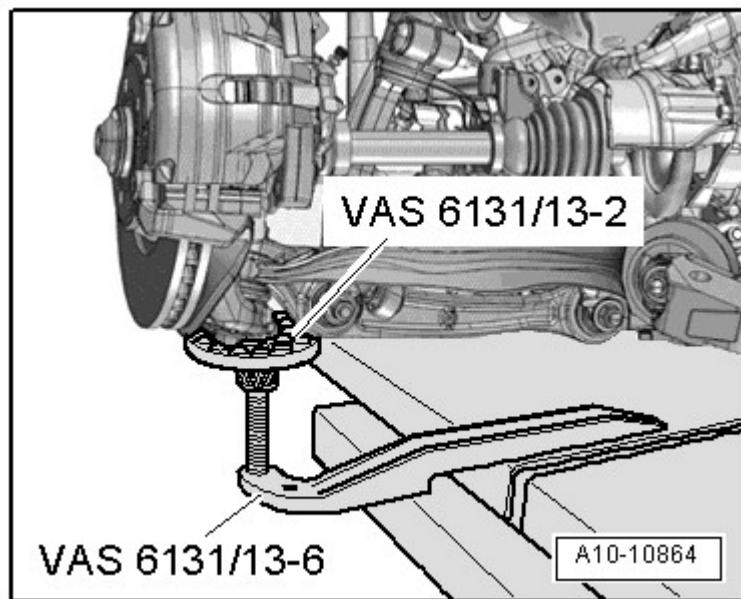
Attaching At Lower Left And Right Of Wheel Bearing Housing
